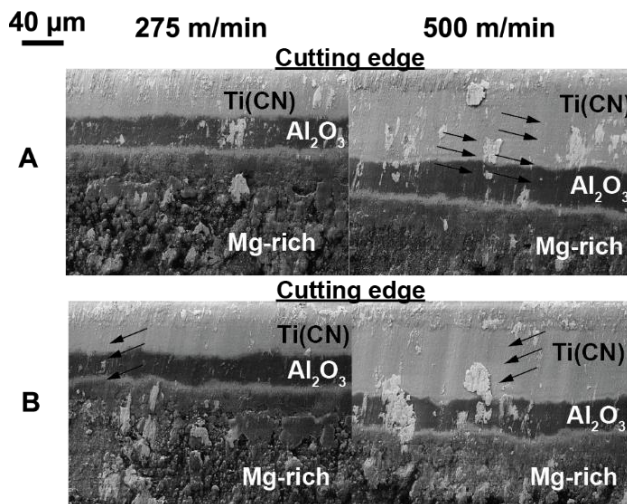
Detail SEM images of flank face of worn inserts for both tool grades at cutting speed 275 m/min and 500 m/min. Abrasive marks indicated by black arrows.
